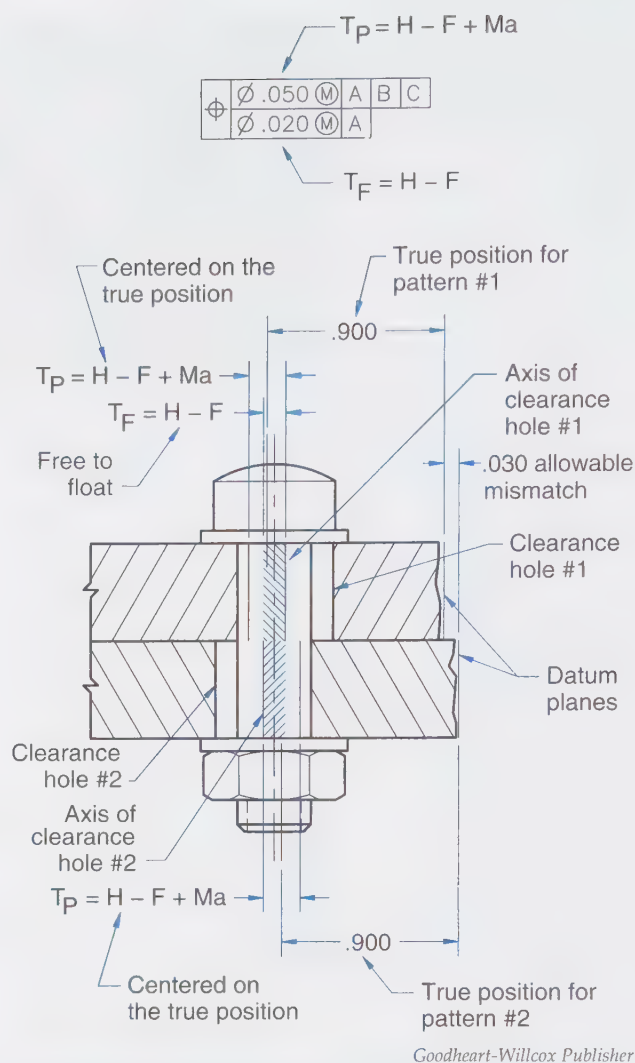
A composite position tolerance specification has a pattern-locating tolerance that permits relative movement of the assembled parts and a feature-relating tolerance that ensures the fasteners can pass through the holes.
